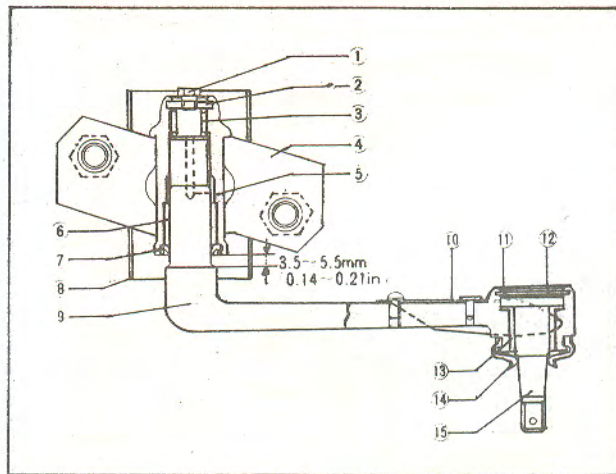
Sectional view of the steering idler arm mounting as fitted to left-hand drive steering linkage.
